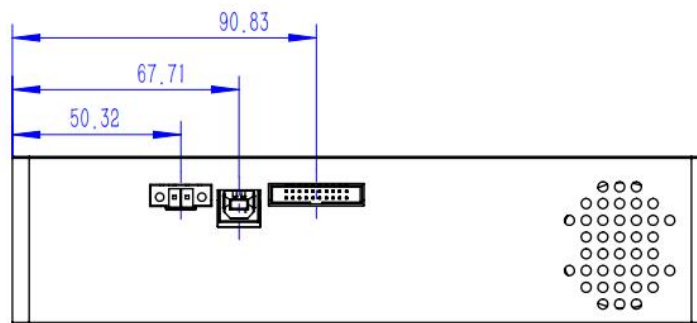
Mechanical dimension drawing (side view), 4 holes are fixing holes for installation and fixing
